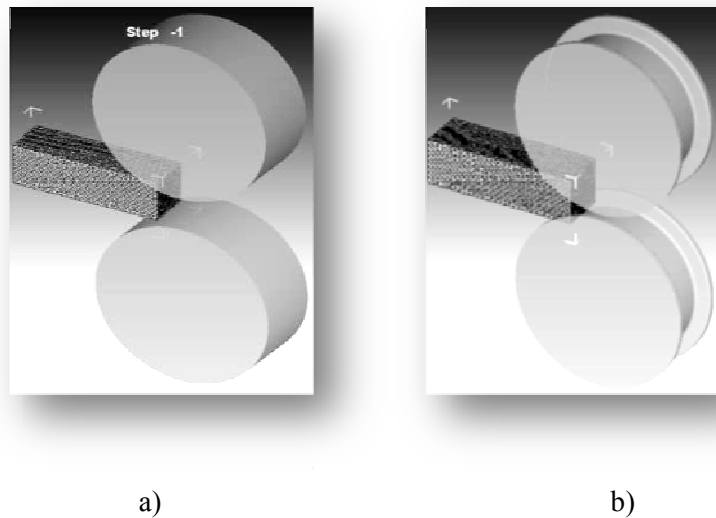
Geometric rolling model: a — in smooth rolls; b — rectangular gauge
